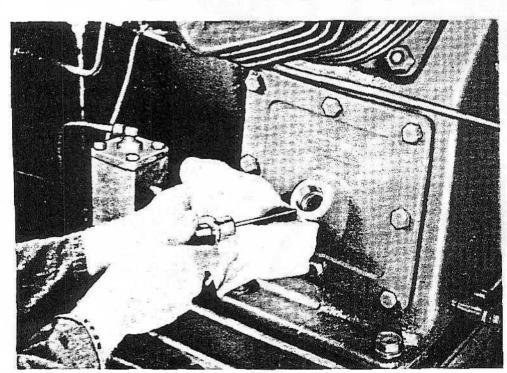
Wiping Off Oil Gage with a Clean Rag Before Reading the Oil Level
